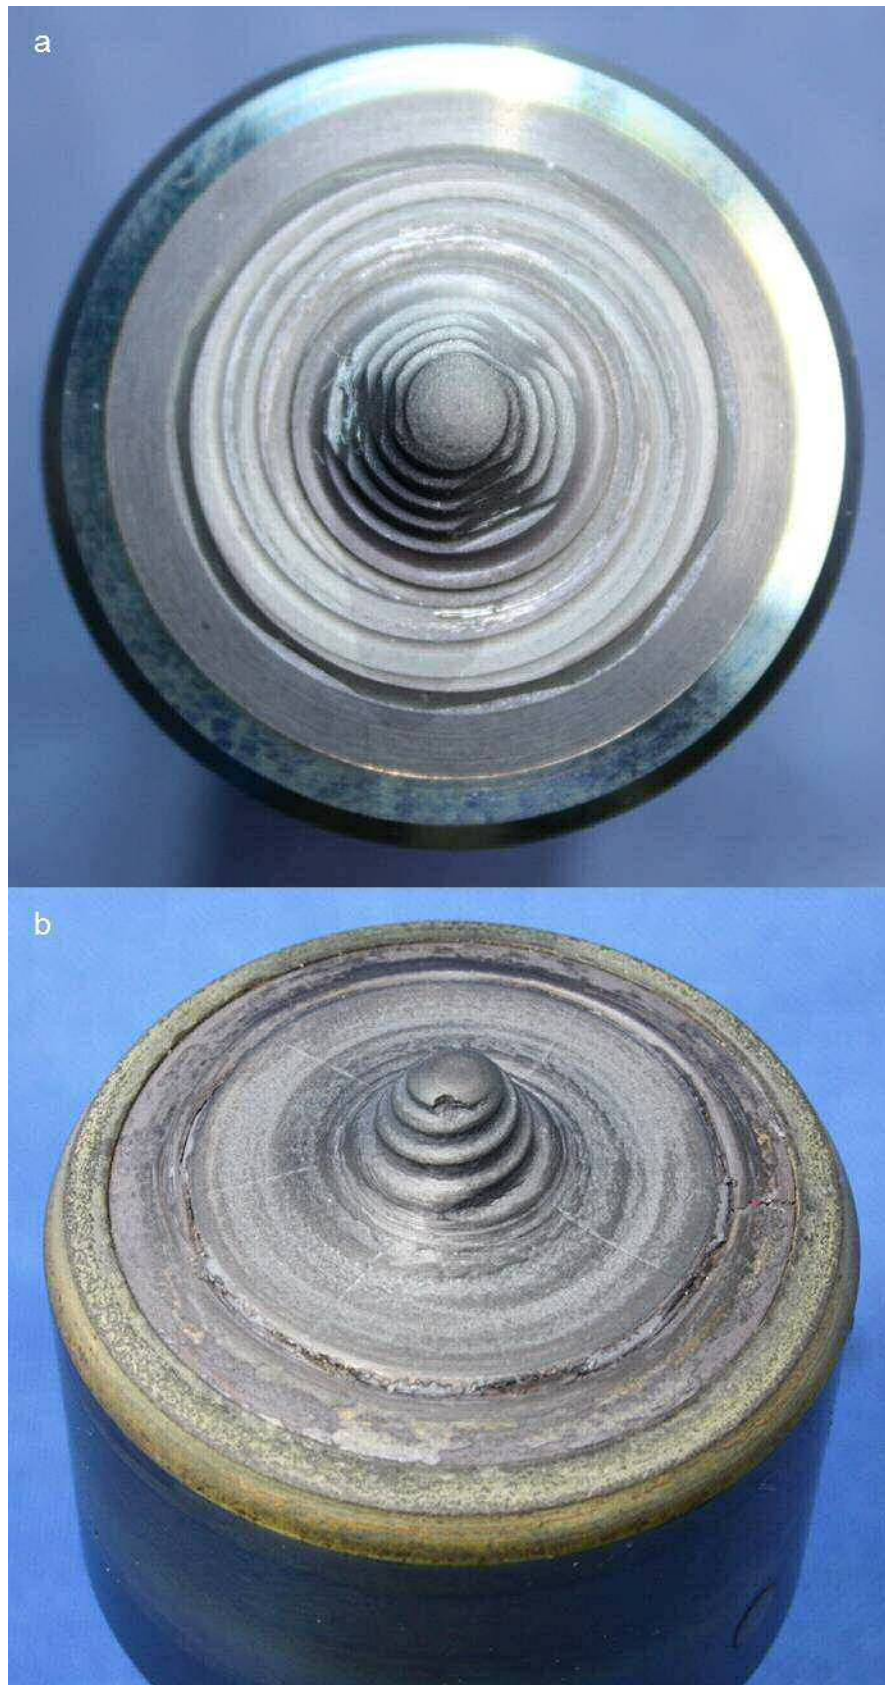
WRe-pcBN FSW tool for steel (a) brand new; (b) after welding approx. 20 m of DH36 steel [1.57]
